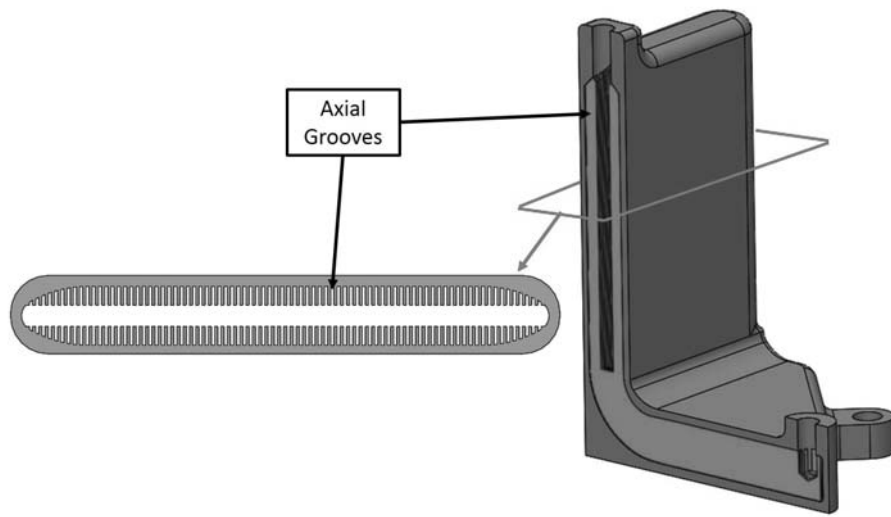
Sectioned model of designed heat pipe showing internal axial grooves.
